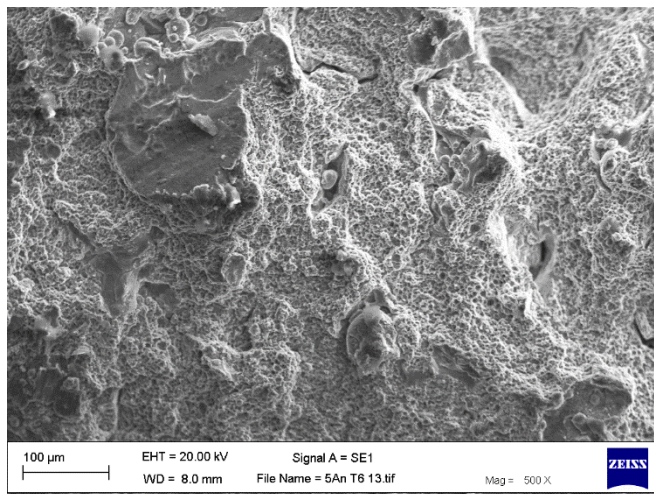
Fracture surface of 5-SR T6 Al-MMC
